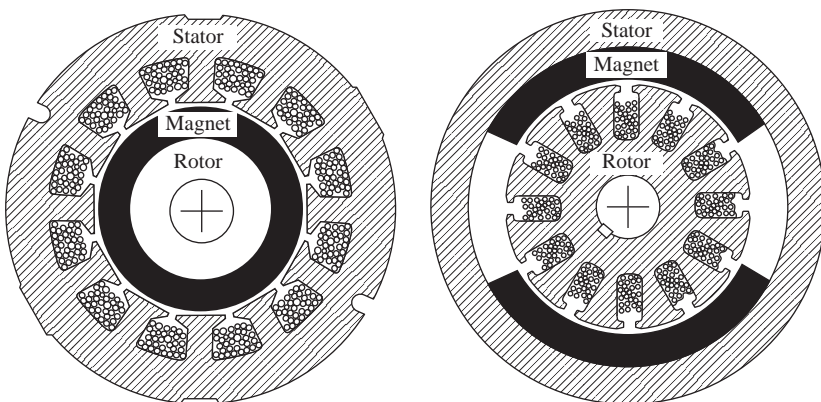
Cut-away view of brushless and conventional dc motor assemblies
